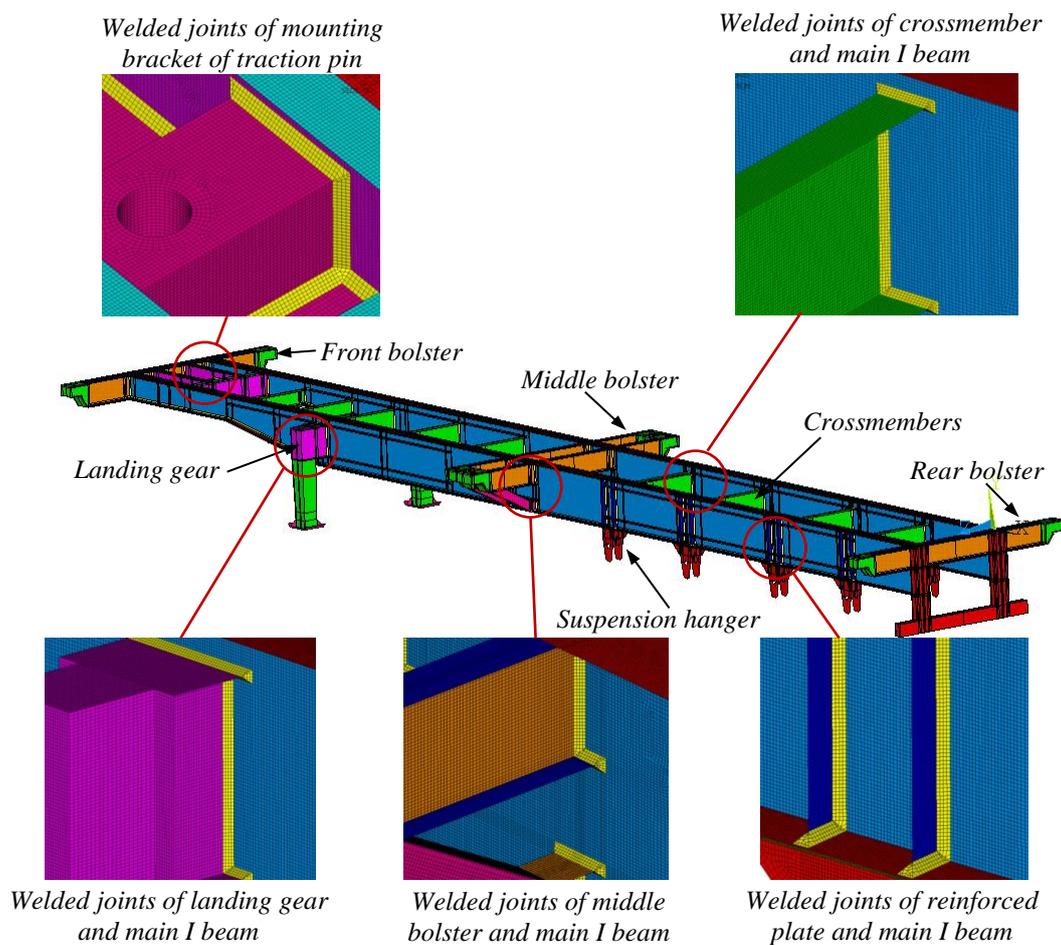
The modeling of fillet welded joint using inclined shell elements
